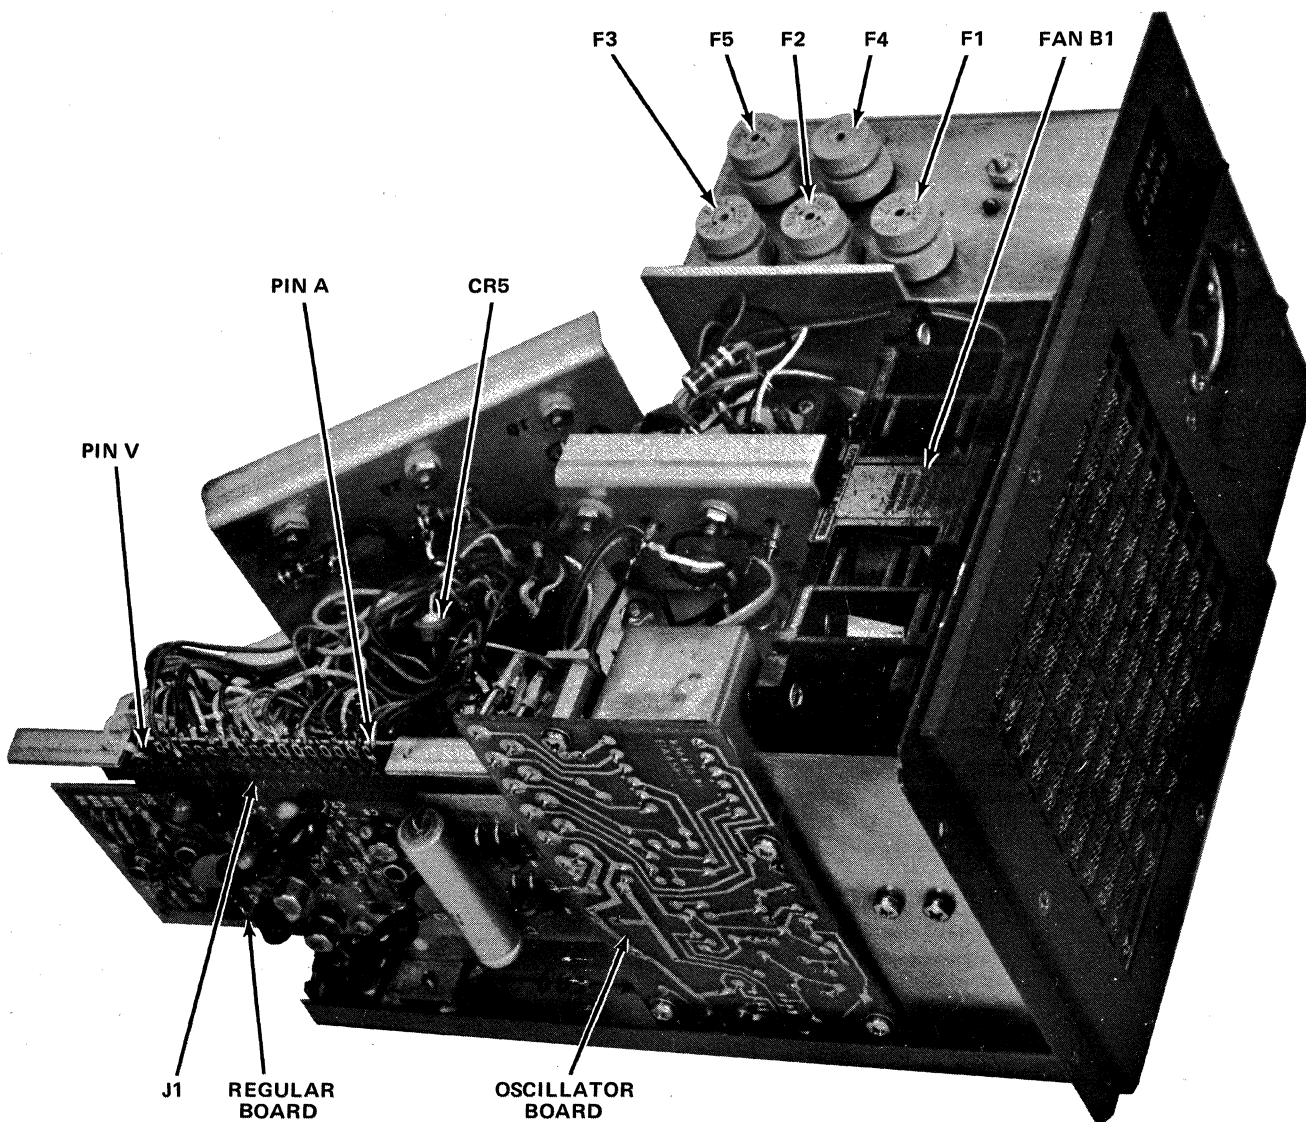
Main Chassis and Rectifier Assembly, Top View
